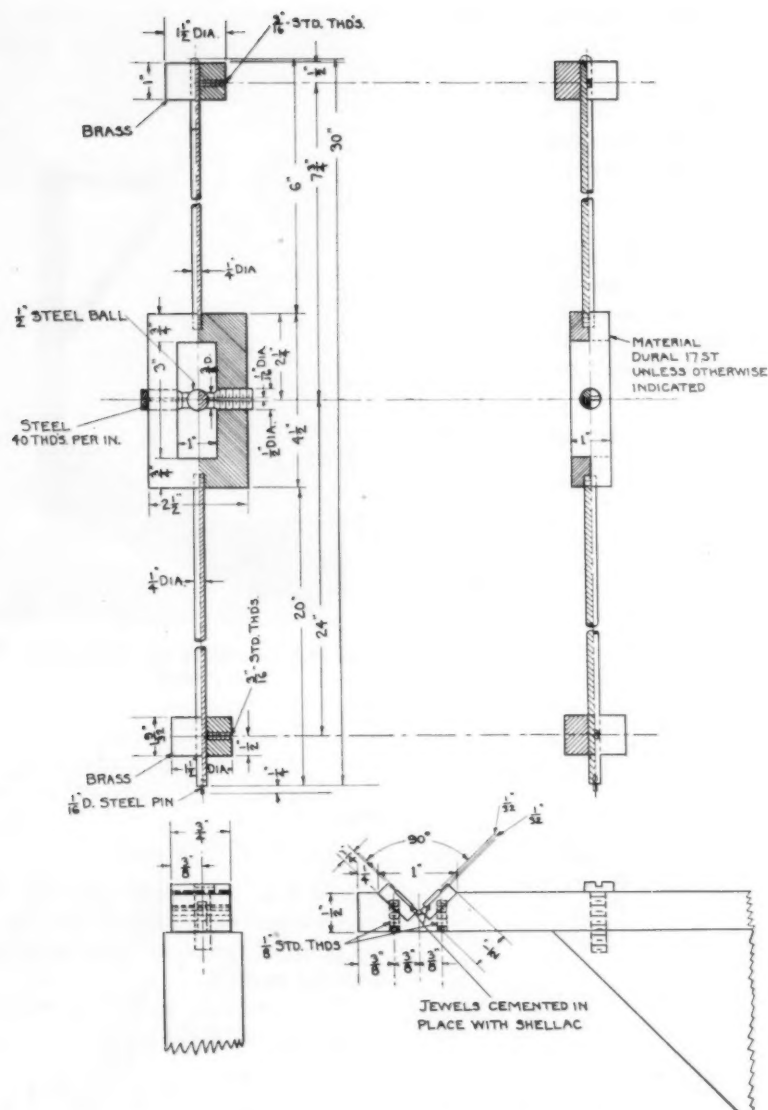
Detailed Drawing of Pendulum and Bearing.
